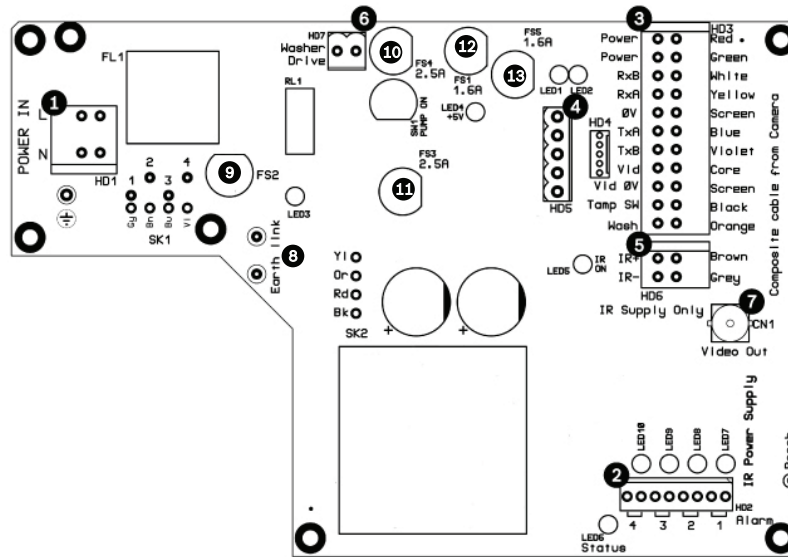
Layout of PCB in enclosure of PSU for MIC IR cameras
